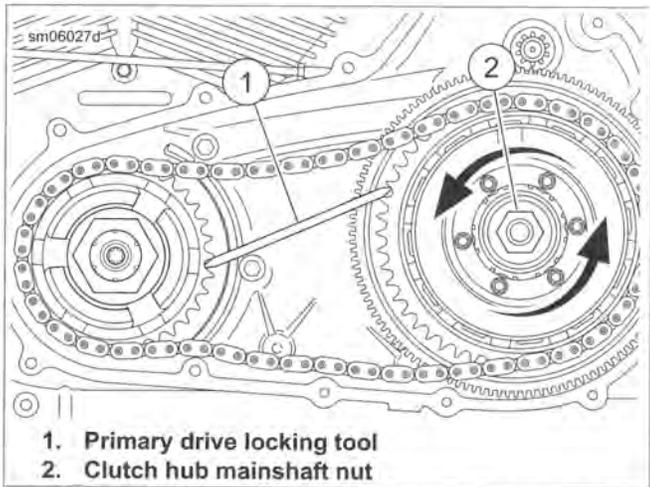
Installing Clutch Hub Mainshaft Nut
